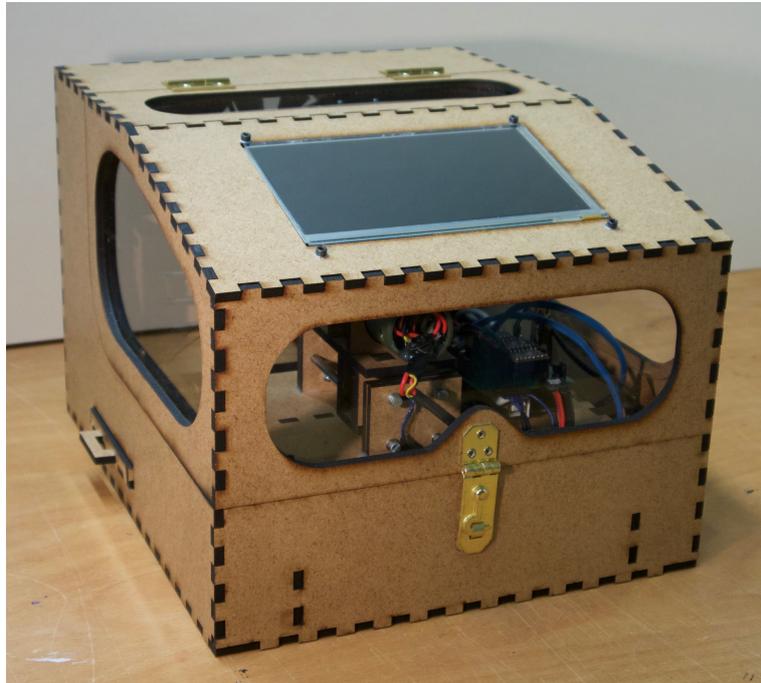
Exterior view of the assembled device with a case encapsulating the interior milling system.
